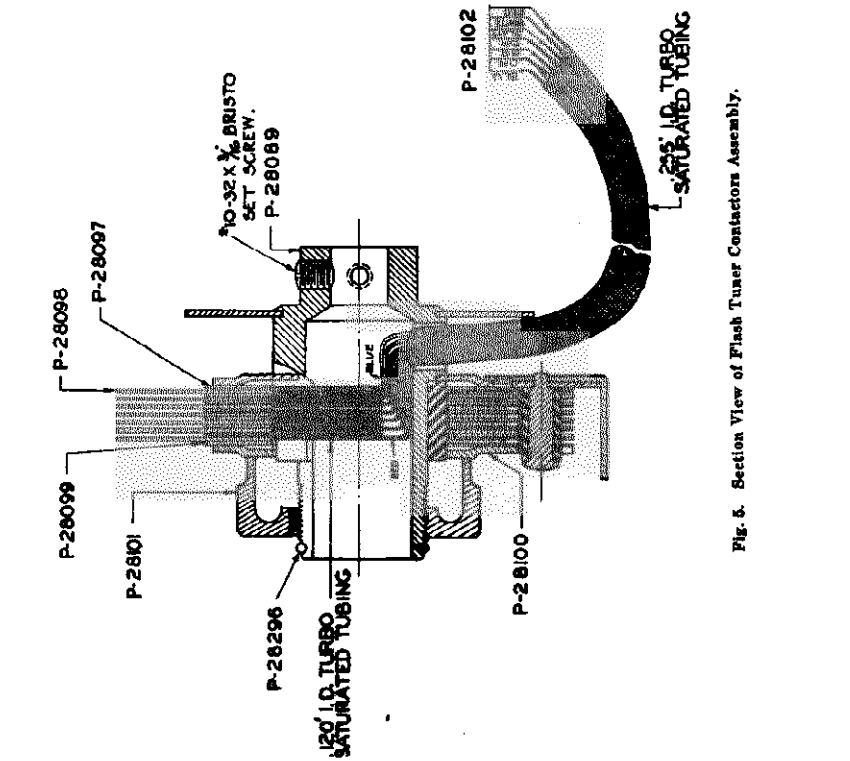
Section View of Flash Tuner Contactors Assembly.
